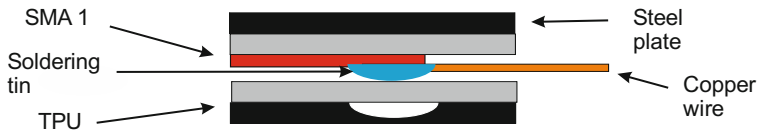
Set-up for joining the sensor parts using a pressing mold.
